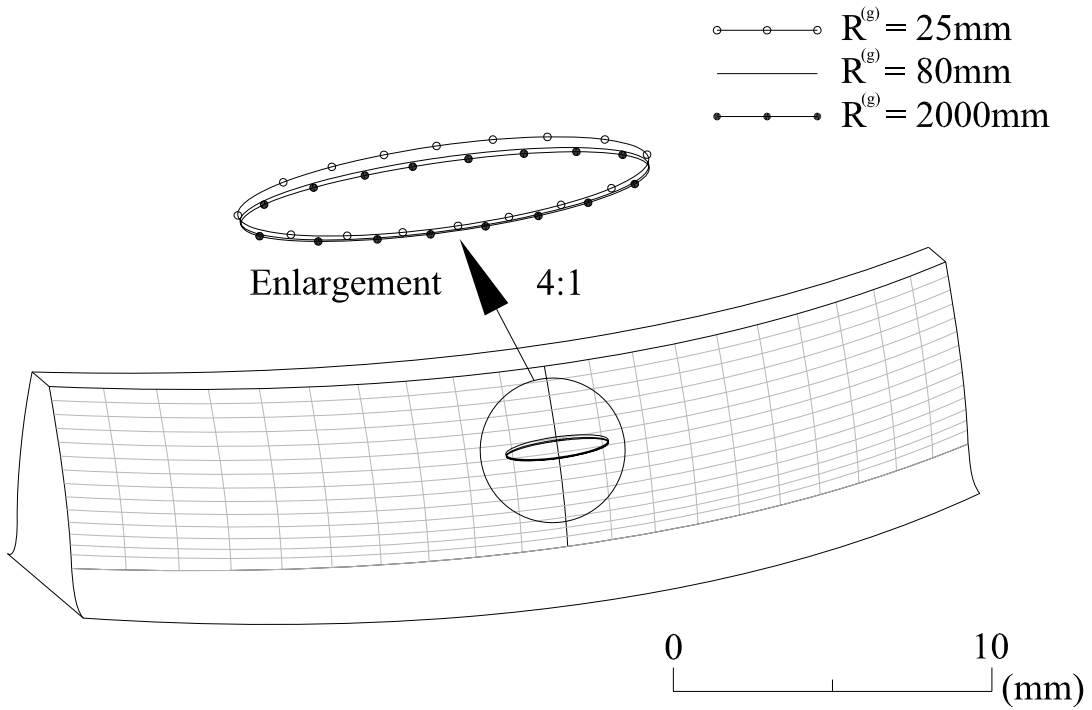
Contact ellipses on the gear tooth surface (Example 6-3)
